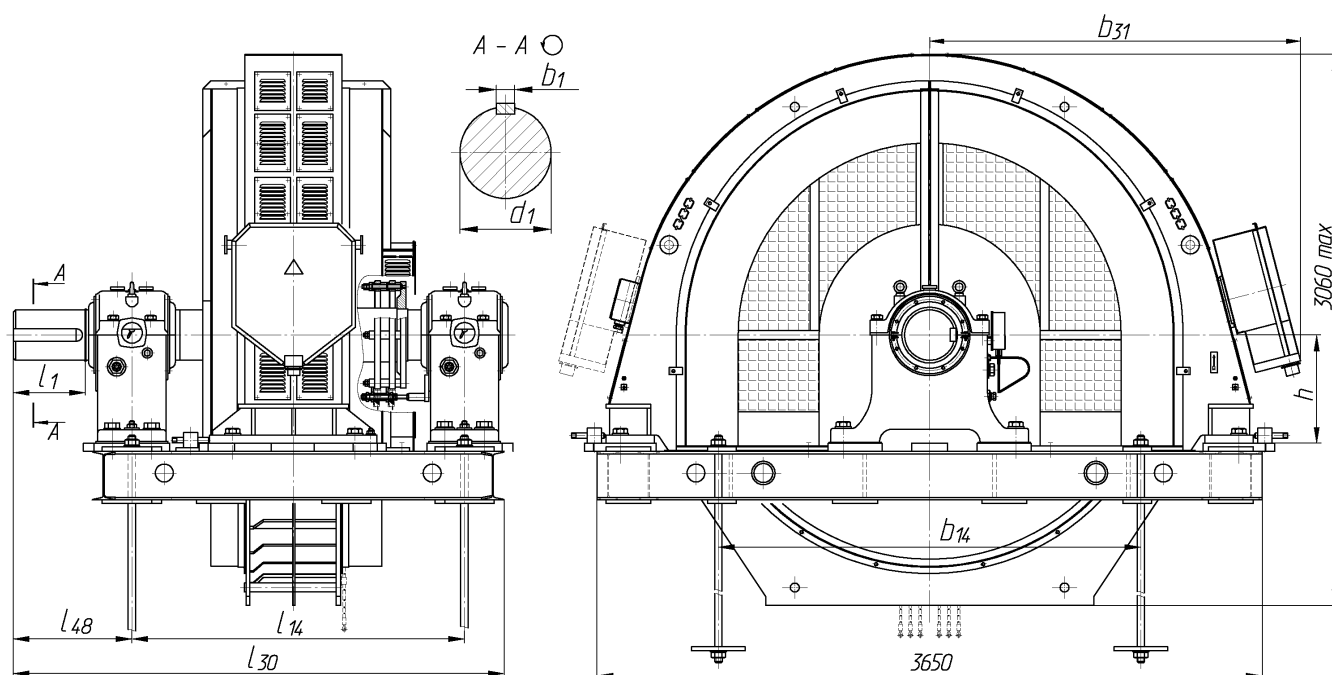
Electric motors of CDC type in the 18th frame. Mounting version IM7311, by cooling way ICA01
